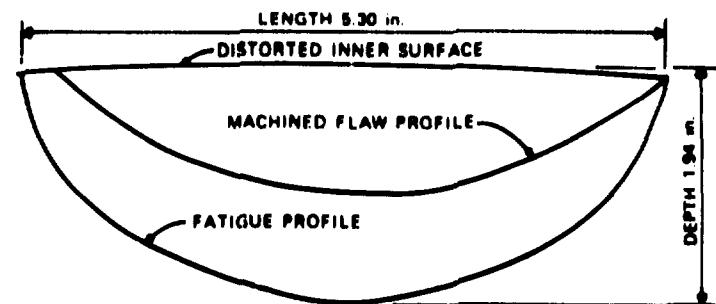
Intermediate vessel V-4 flaw profiles determined after vessel failure.
